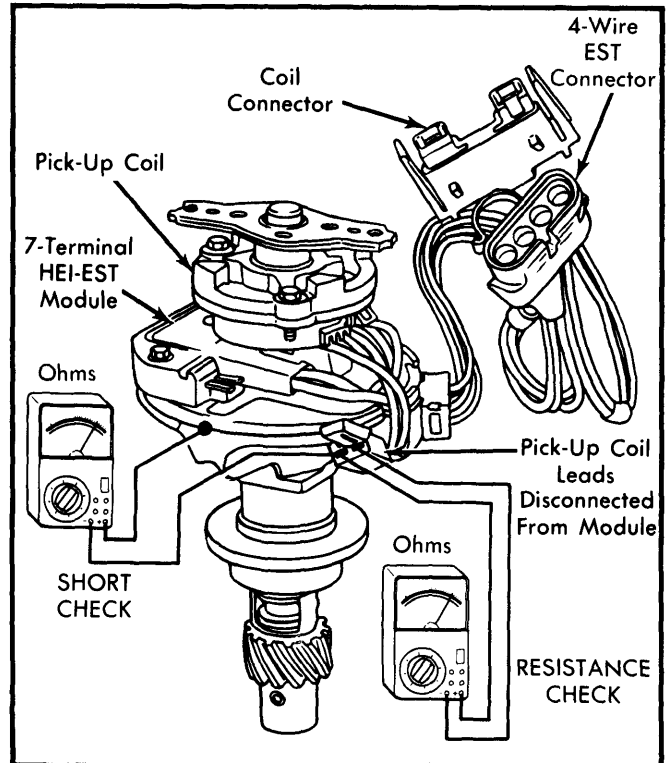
Distributor Pick-Up Coil Short and Resistance Checks (External Coil)
